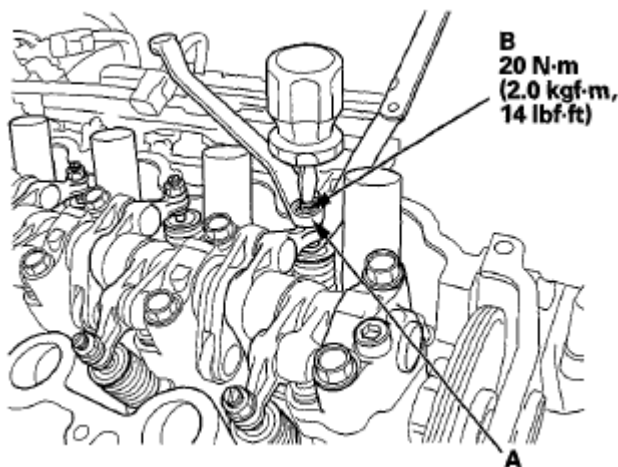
Identifying Intake And Exhaust Valve Clearance
